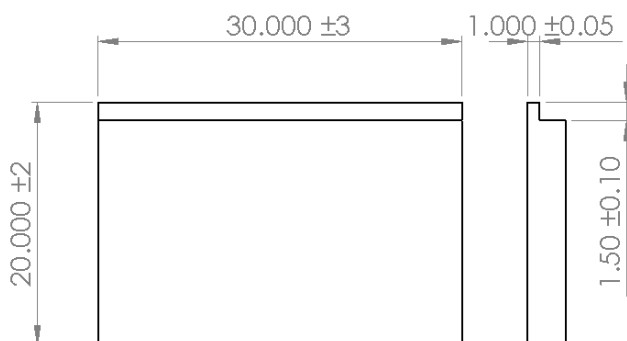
Workpiece drawing: note that the planer experimental cutting trials removed material from the 1mmx1.5mm cross-section.
